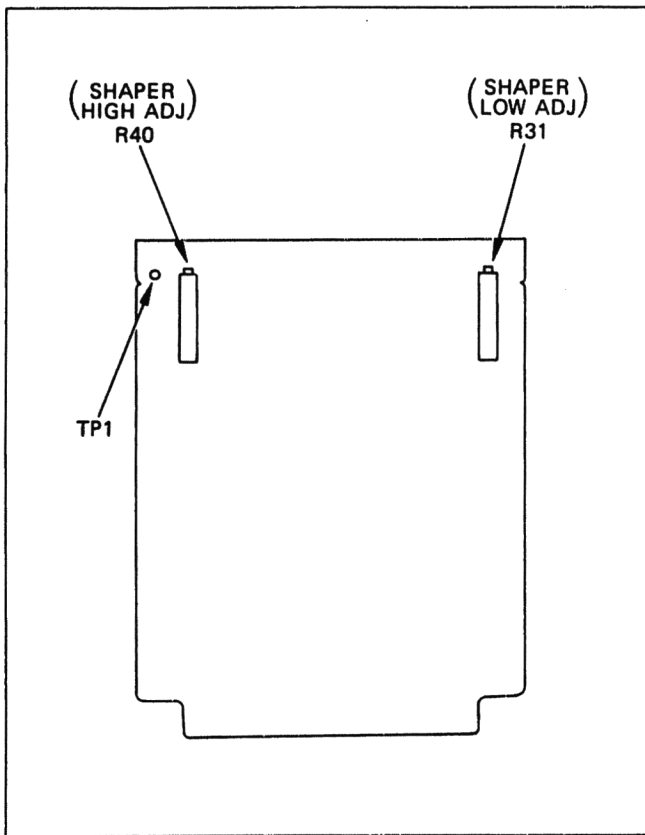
Trimmer Locations, Shaper Assembly, A26
